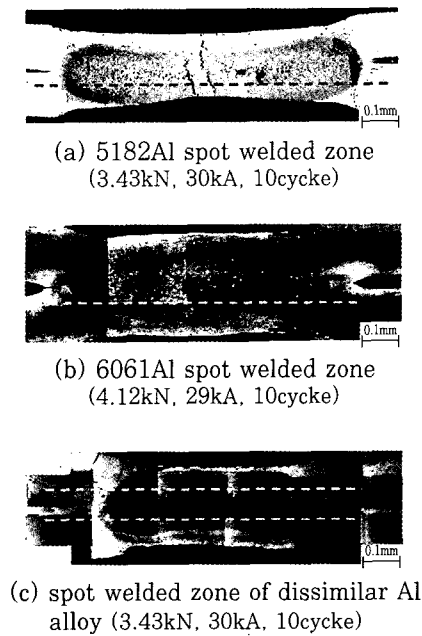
Shape of welding zones of Al alloy (5172Al, 6061Al, 5182Al+6061Al)
